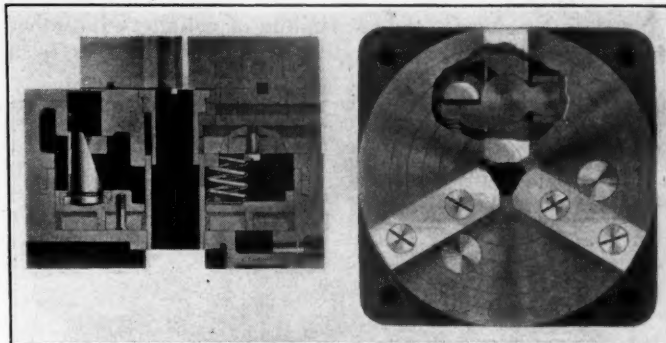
Pneumatic Chuck Used on Drilling Machines
